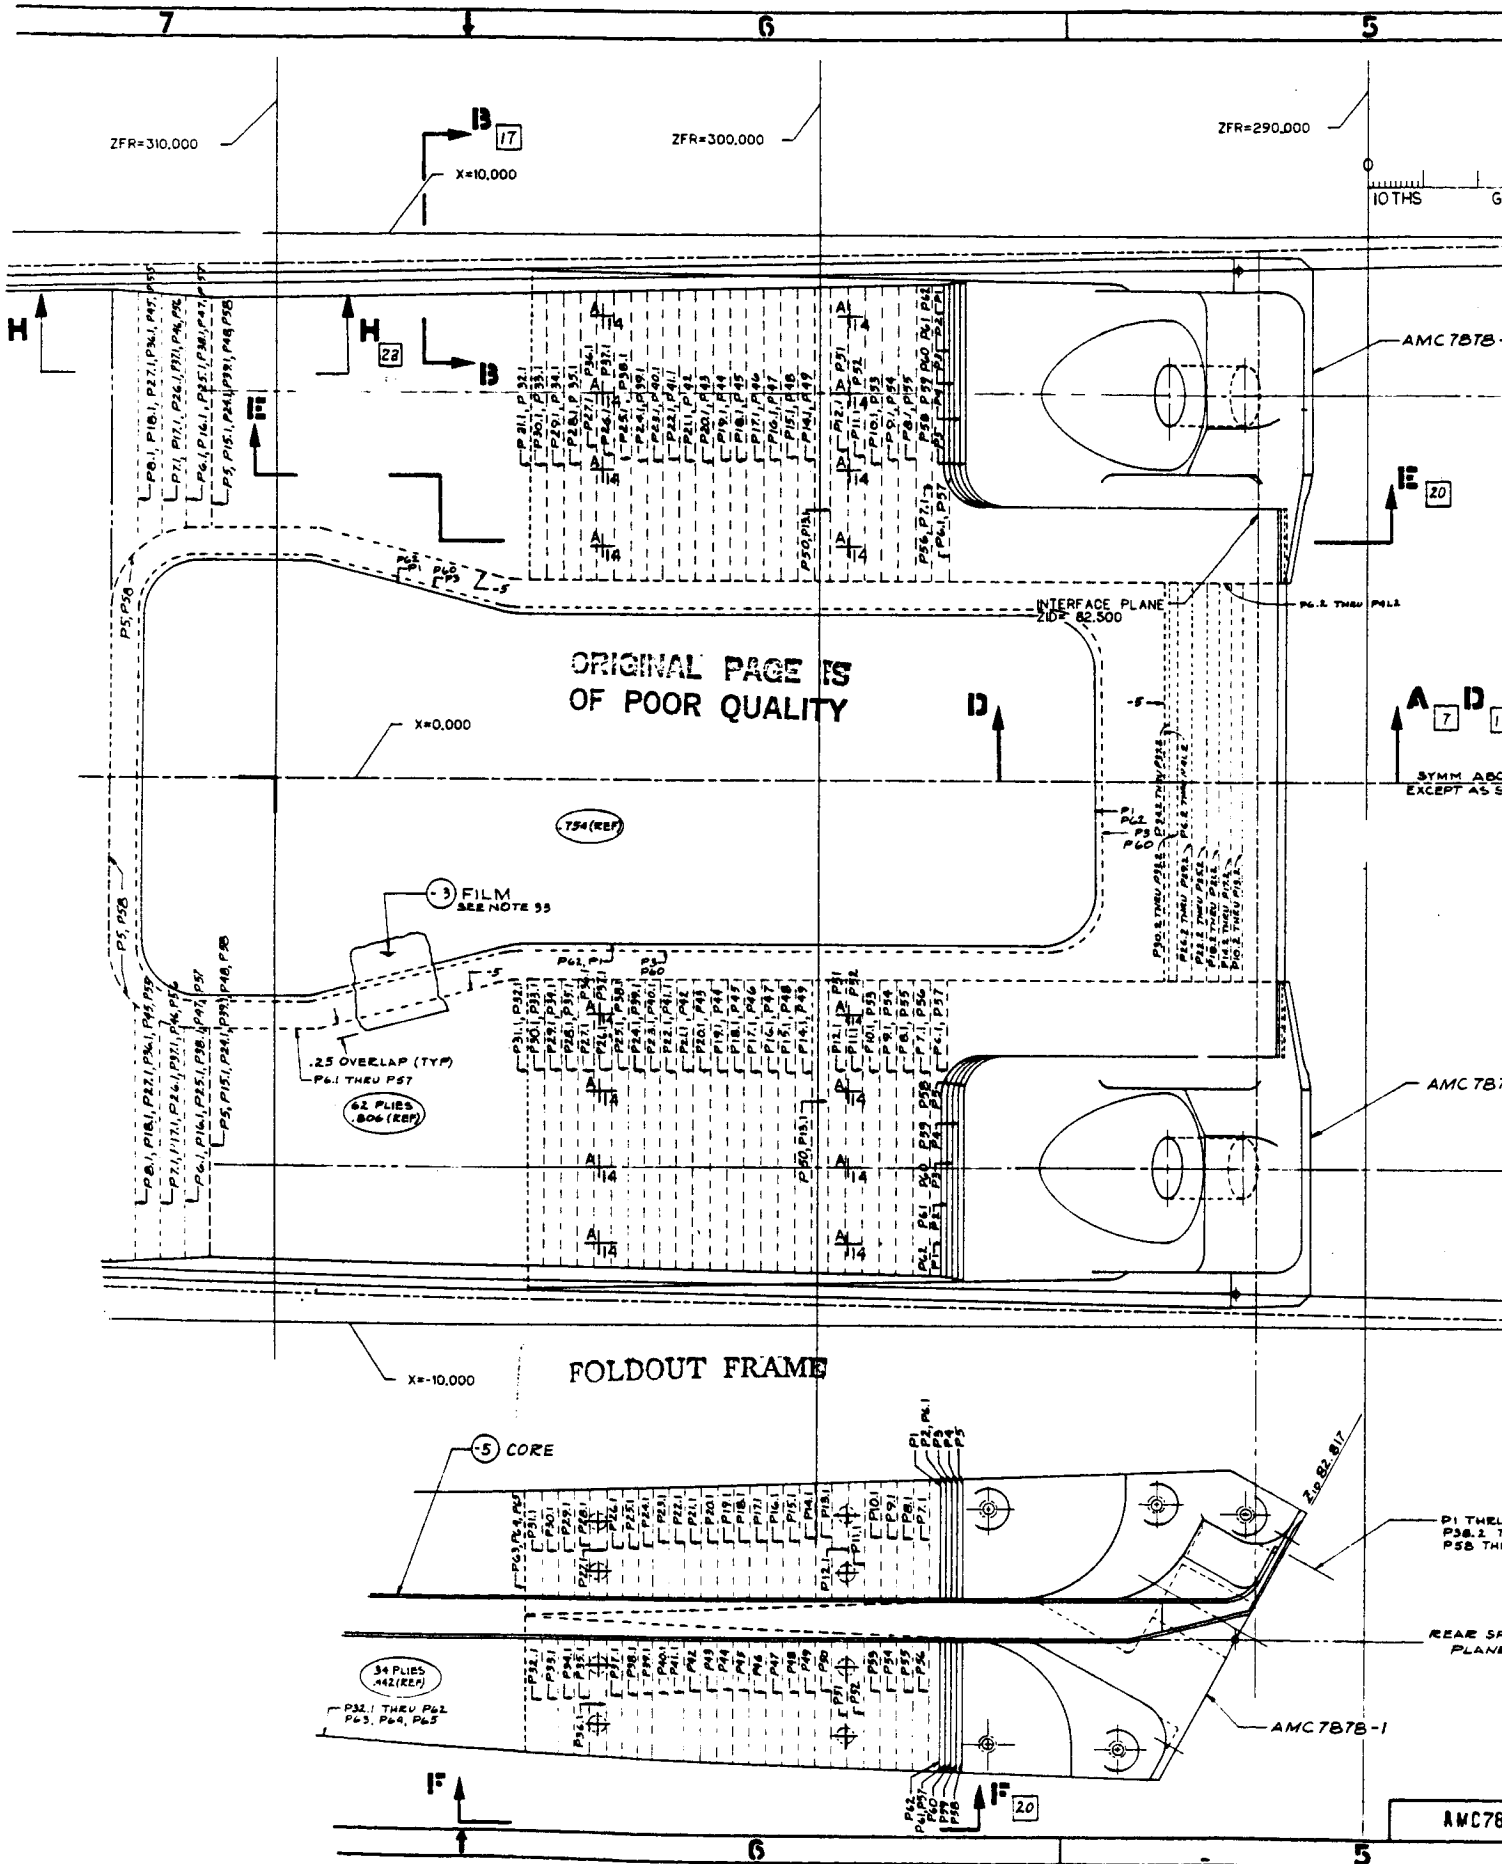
DRAWING AMC7849 - LOWER REAR SPAR ASSEMBLY (SHEET 1 OF 4)
